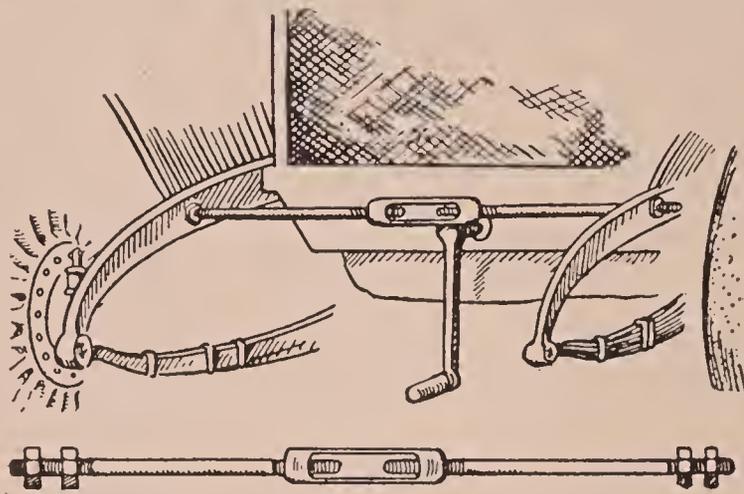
How weak, spread or badly bent front frame members may be drawn together and held firmly.
